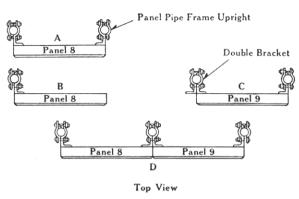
METHOD OF ERECTING PIPE-FRAME SWITCHBOARD.
